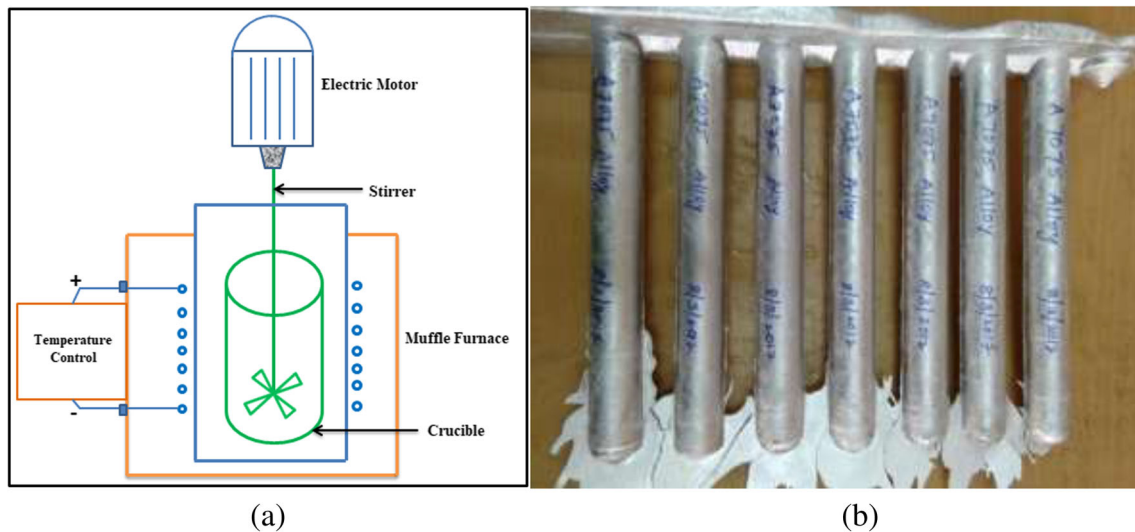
Schematic diagram showing (a) stir casting process and (b) casted specimens
